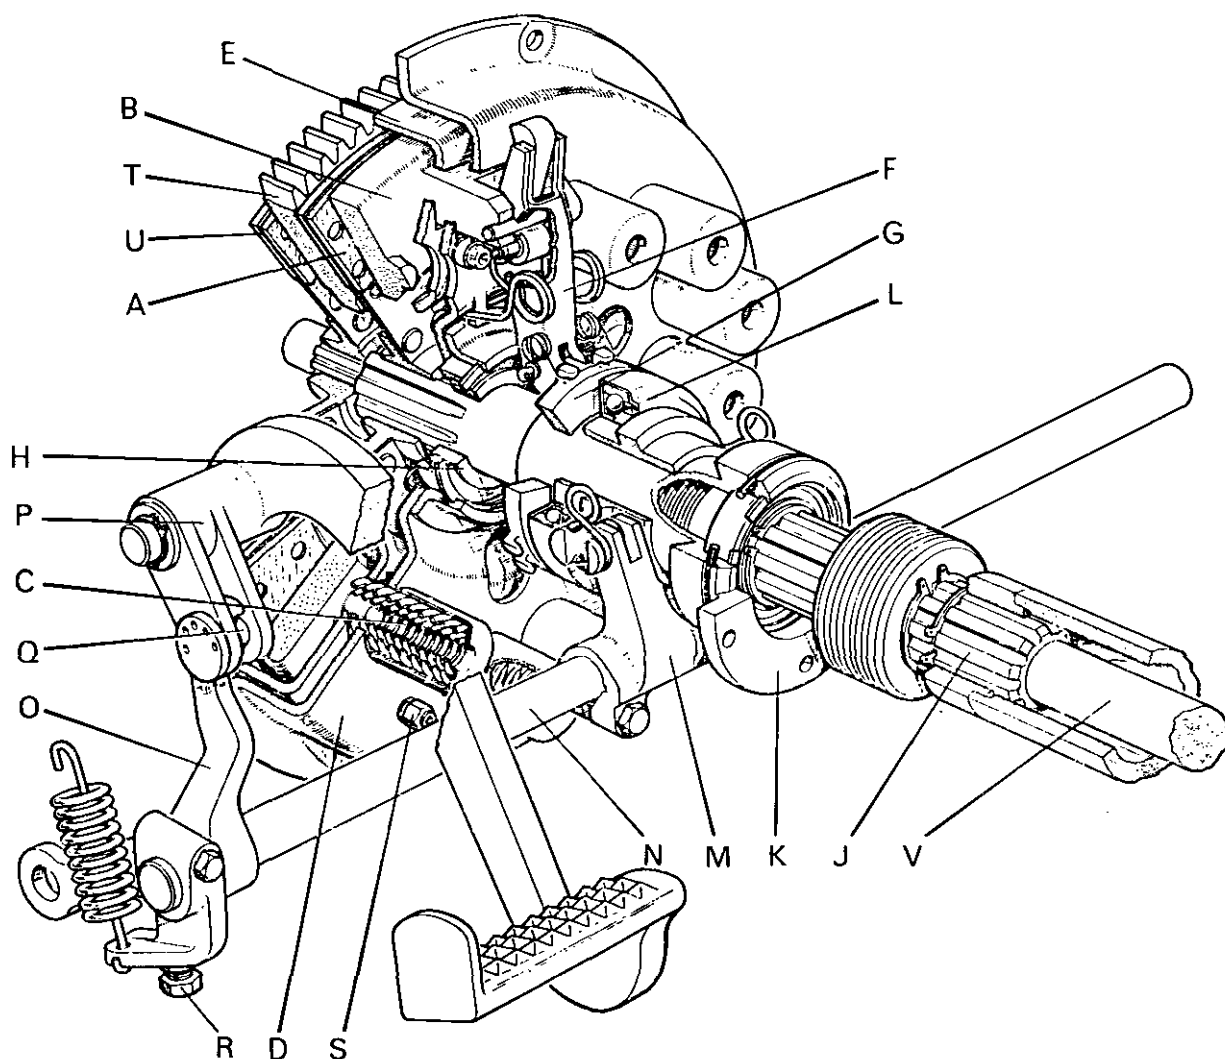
DOUBLE CLUTCH — 880/4600/990 LIVEDRIVE TRACTORS
